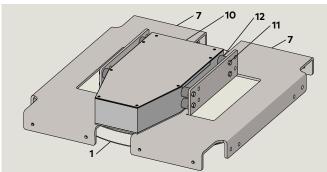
Motion Assist 360 drive and mounting plates
